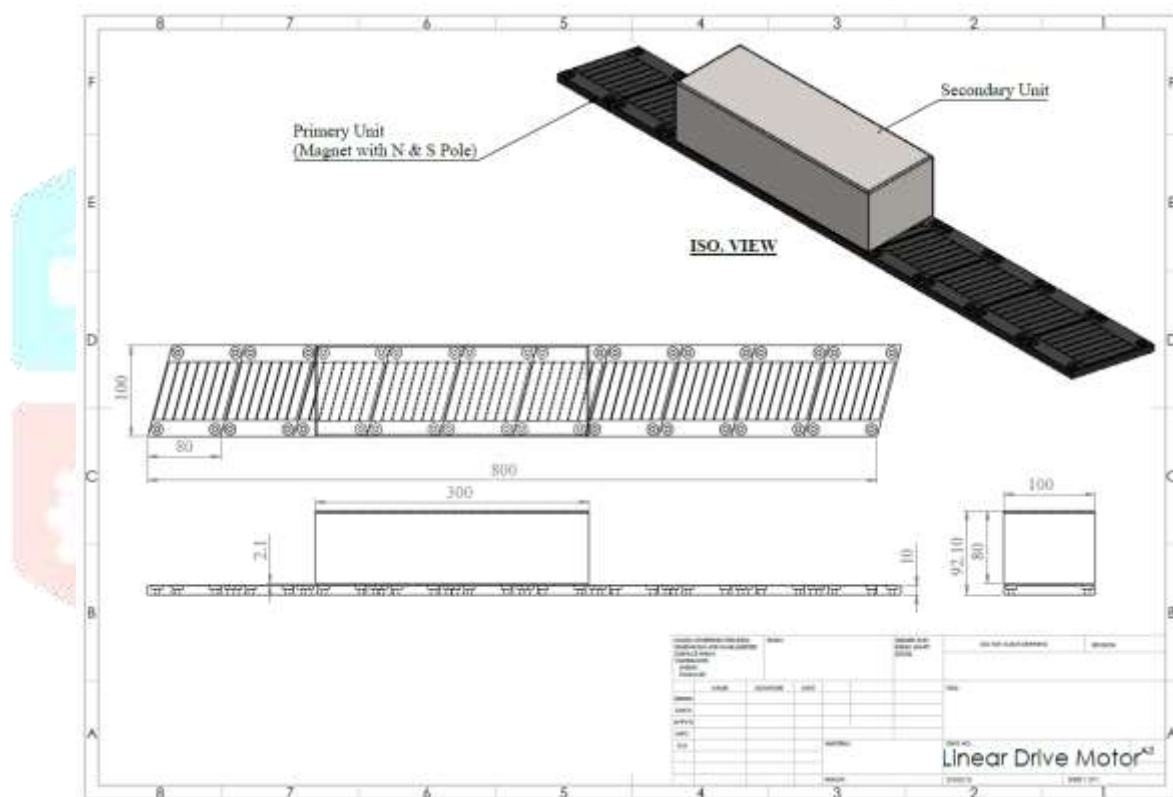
2 D Drawing of Linear Drive Mechanism for XY Axes
